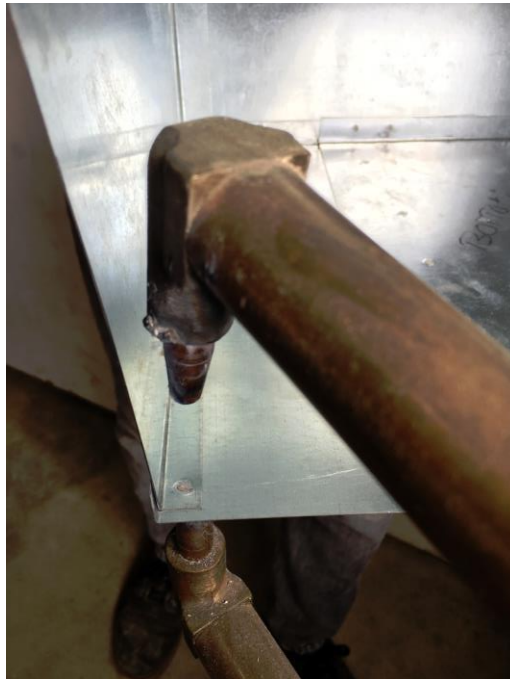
Spot welding the inner box together at the Hangar.
